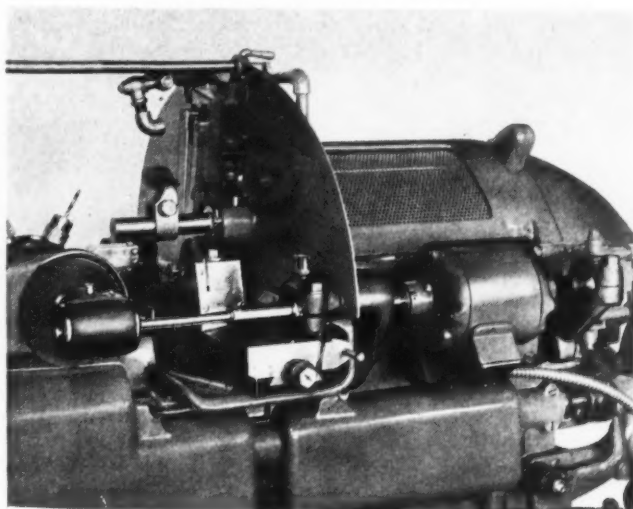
Motor Drive for Turret Drilling Attachment Applied to B & S No. 2G Automatic
